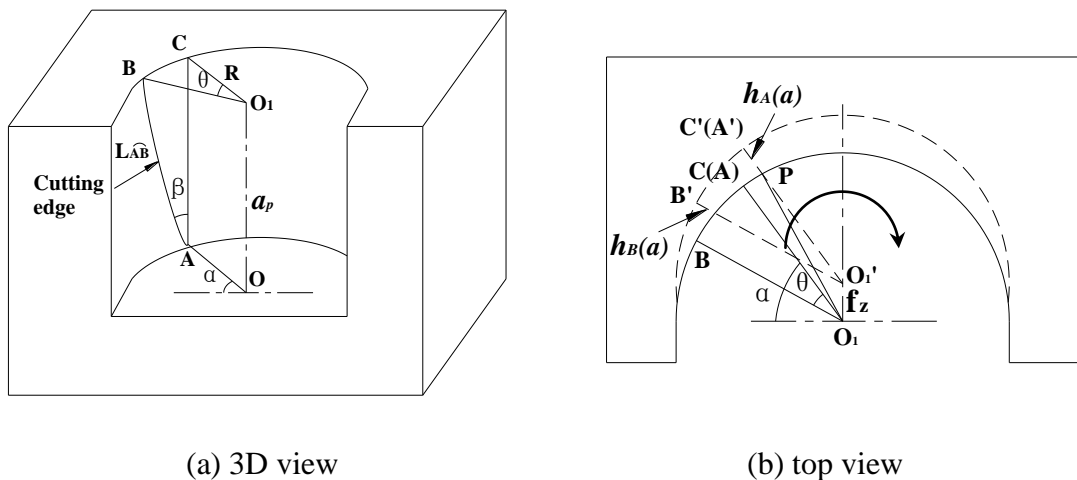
Schematic diagram of a workpiece in full immersion slot milling
